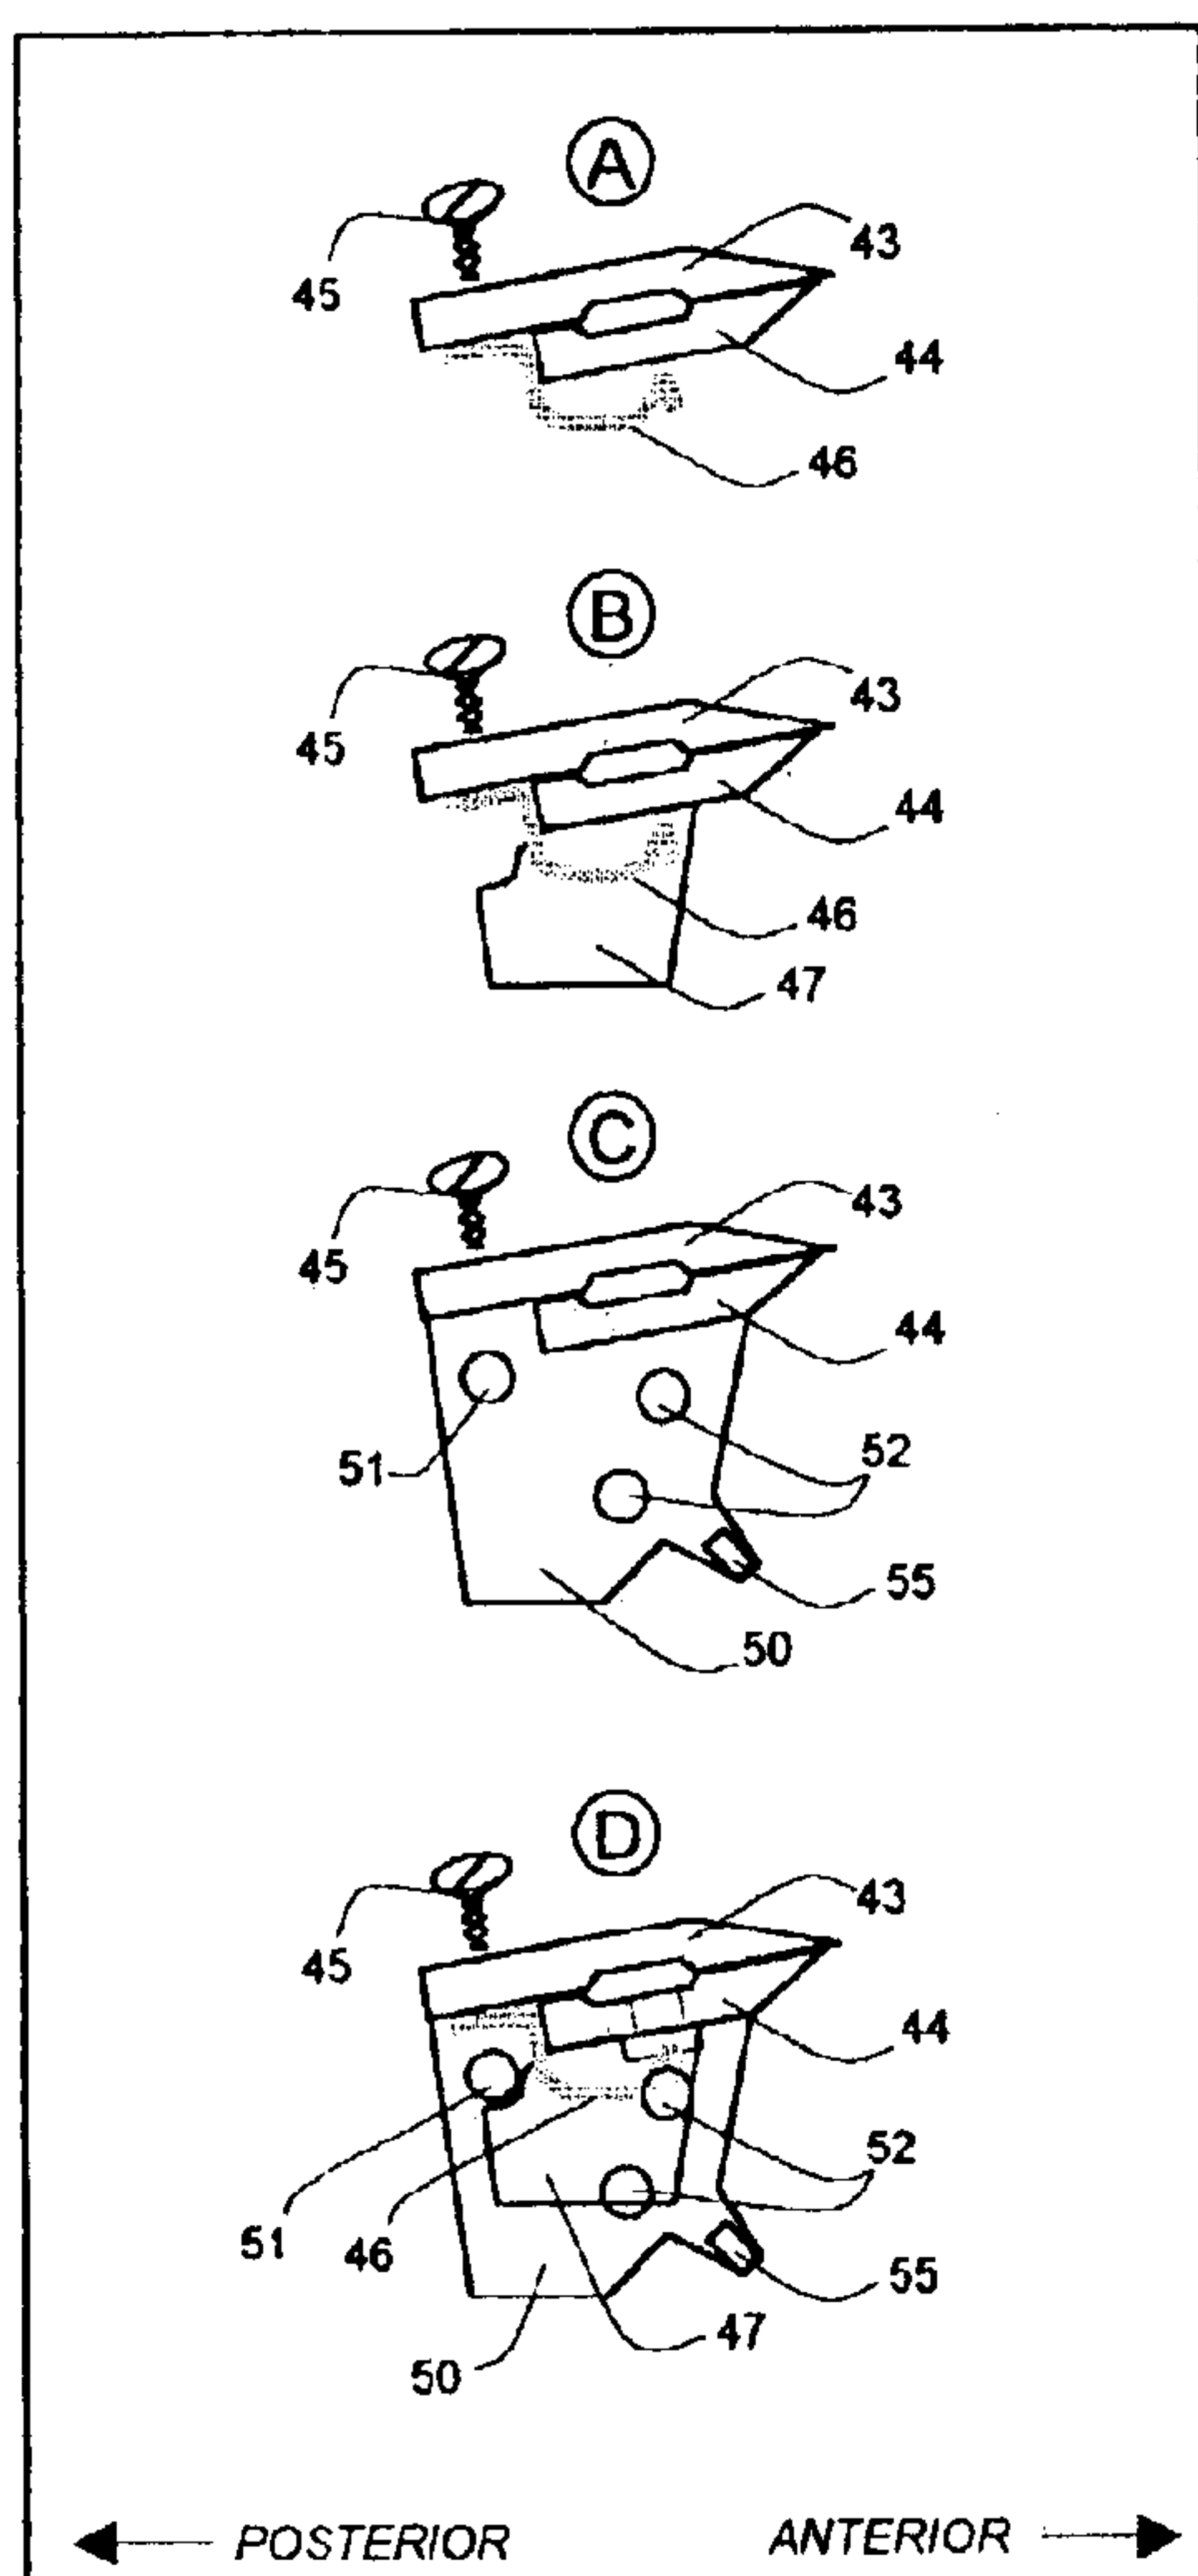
BLADE ASSEMBLY PIVOT ACTION:
